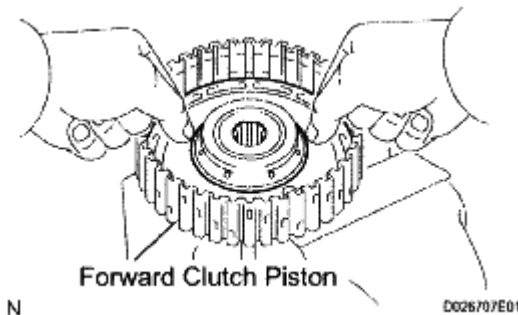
Identifying Forward Clutch Piston Sub-Assembly
